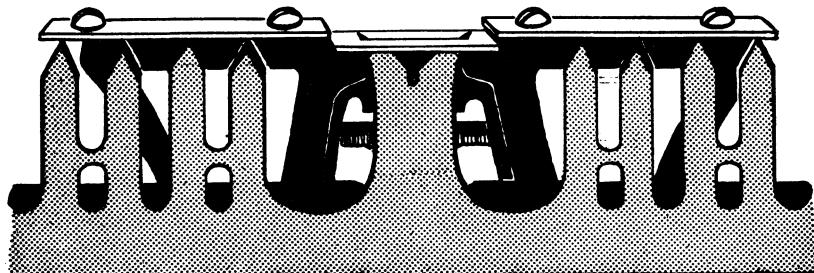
The jointing gage fits over the crosscut saw rakers.
